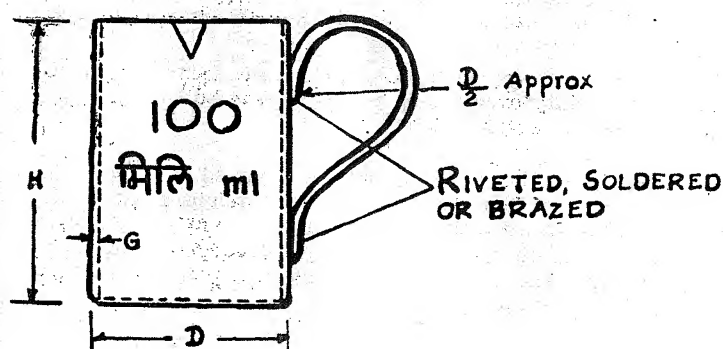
Pouring type Cylindrical measure (Schematic)
